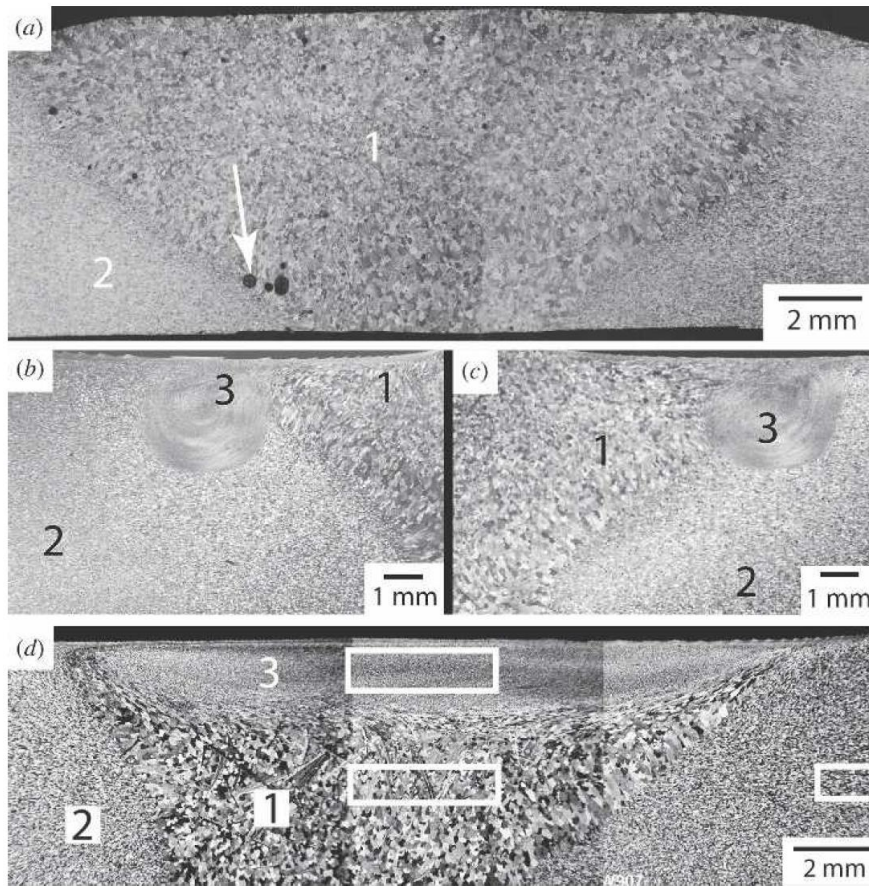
Light macrographs of 5083-H321 Al/5356 Al arc weld in the following conditions: (a) As-welded, (b) Weld toe FSP with arc weld nugget on advancing side, (c) Weld toe FSP with arc weld nugget on retreating side, (d) Weld crown FSP [37].
